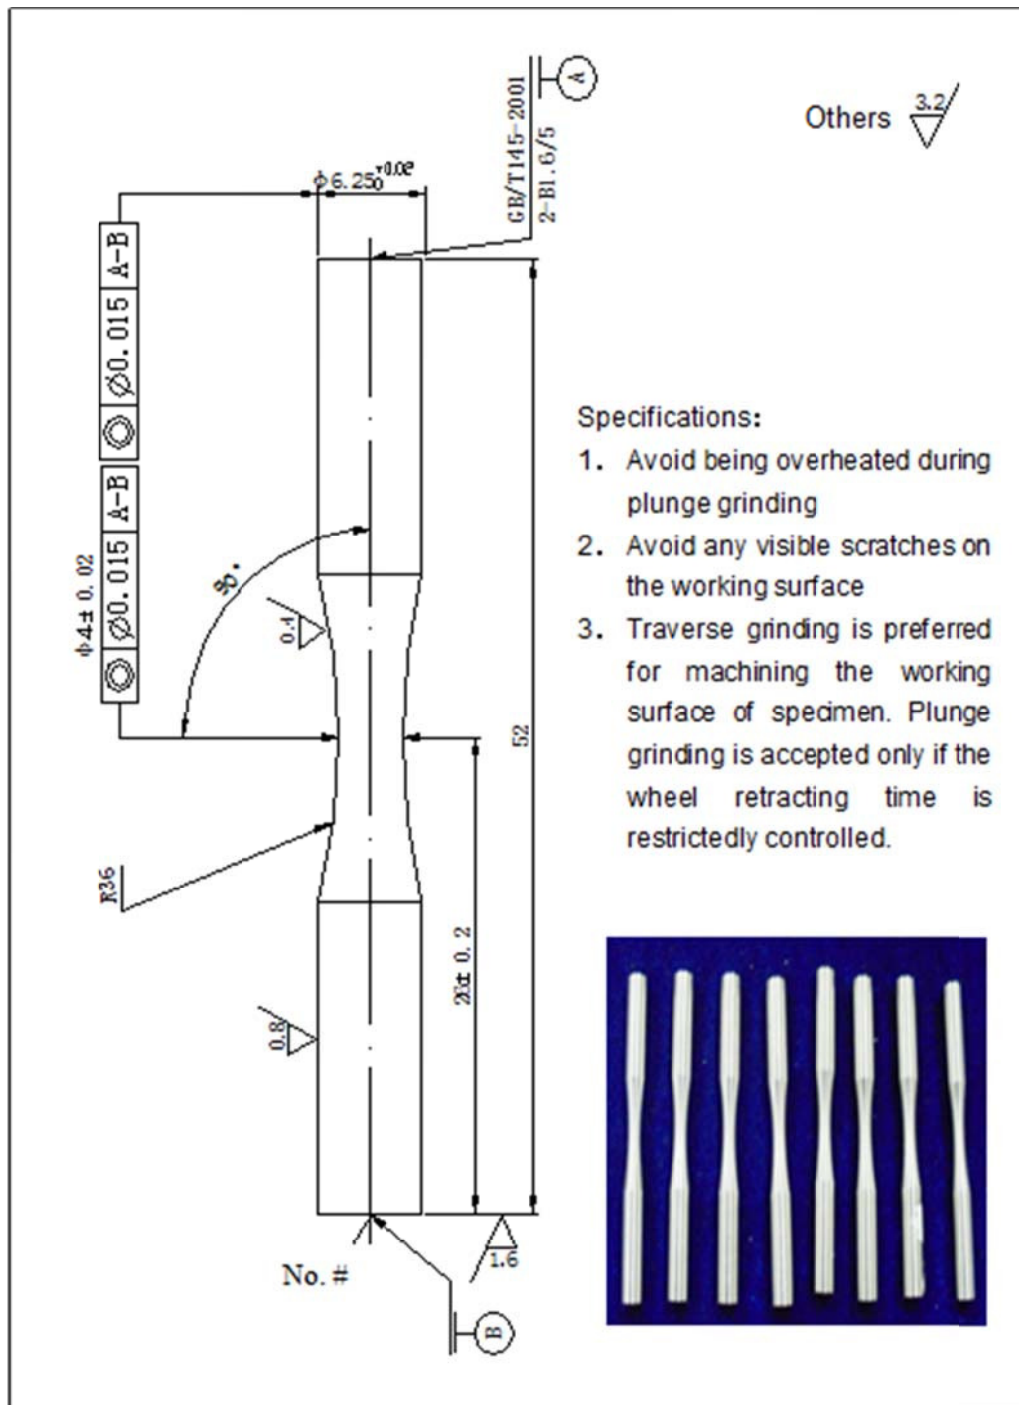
Machining specifications for GH4169 rotary bending fatigue specimens
